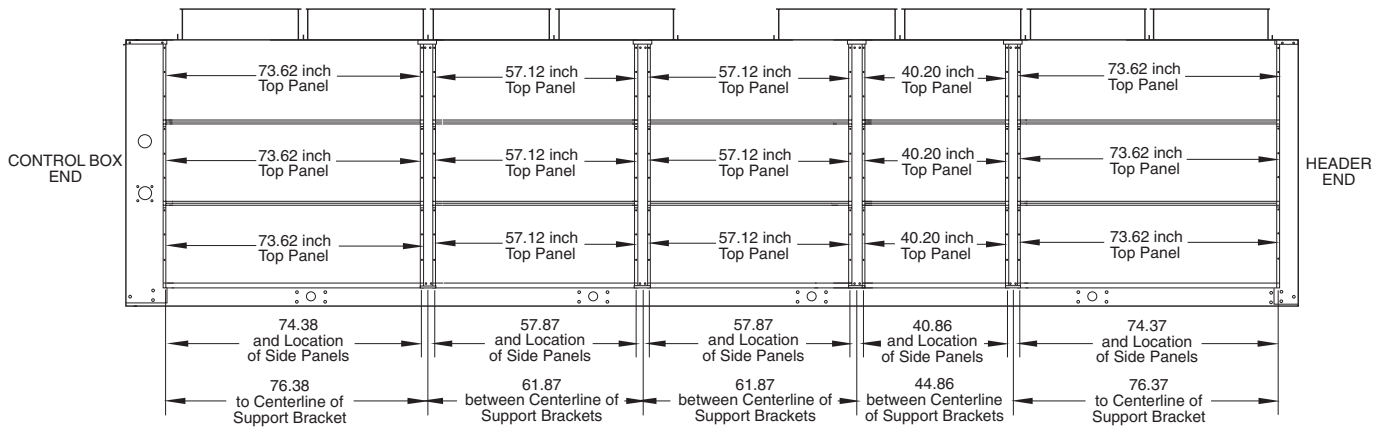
F — Unit Assembly, 30GXN,R249,250,264 and Associated Modular Units — Both Sides
